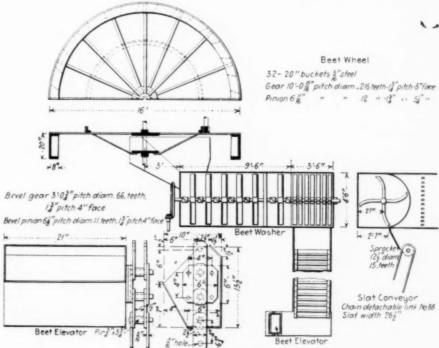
BEET WHEEL WASHER AND ELEVATOR
